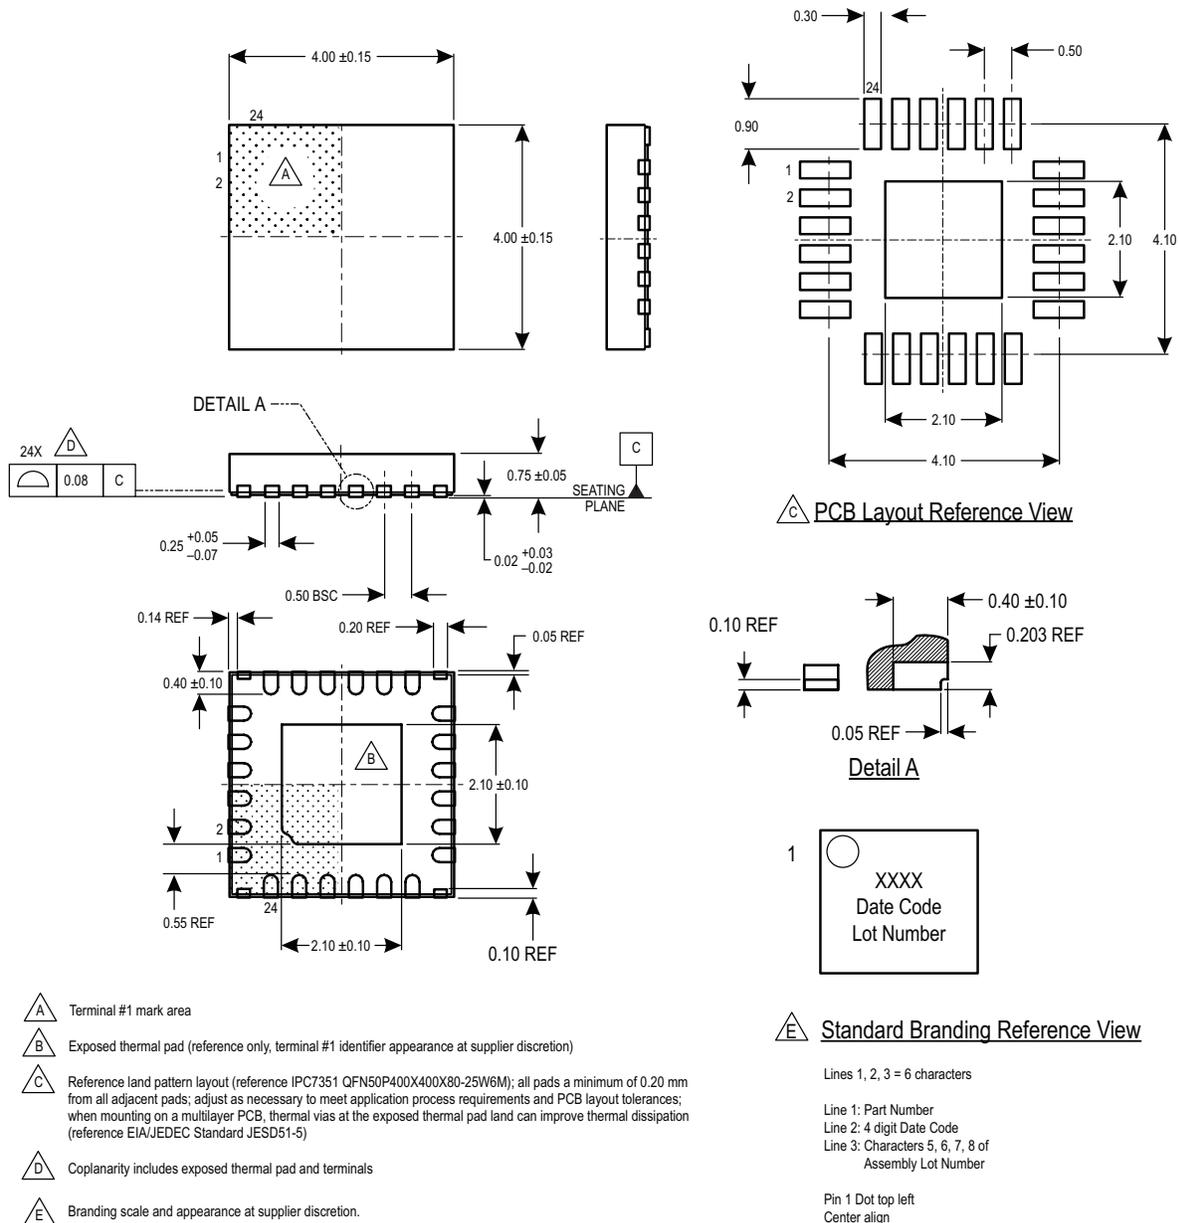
Package ES, 24-Pin 4 mm × 4 mm QFN with Exposed Thermal Pad and Wettable Flank
